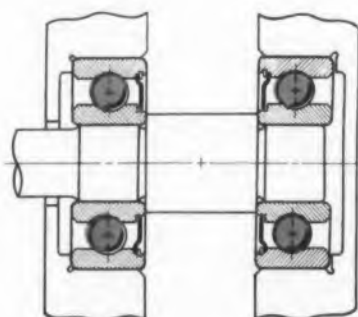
Opposed mounting with unflanged bearings with positive axial clearance in housing avoids thermal thrust constraint. Shaft lock-nuts are not needed for light loads.
